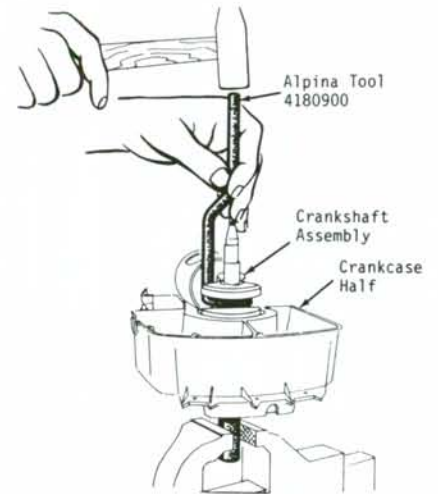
View showing installation procedure of crankshaft and connecting rod assembly into crankcase half using Alpina tool 4180900. Main bearing is pressed into crankcase half prior to installation of crankshaft assembly.
